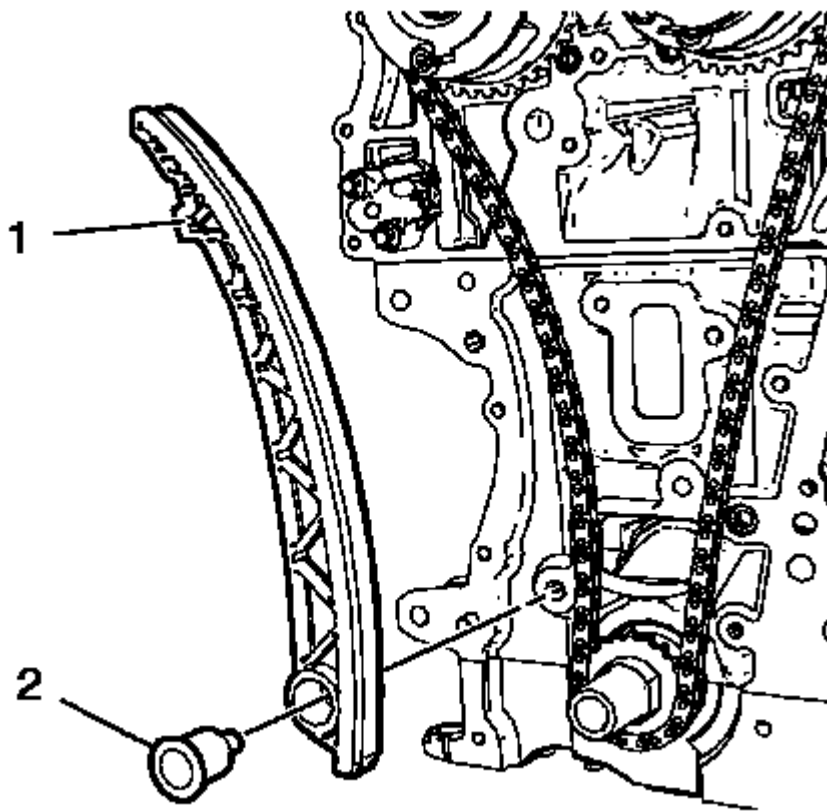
Timing Chain Tensioner Shoe And Bolt
